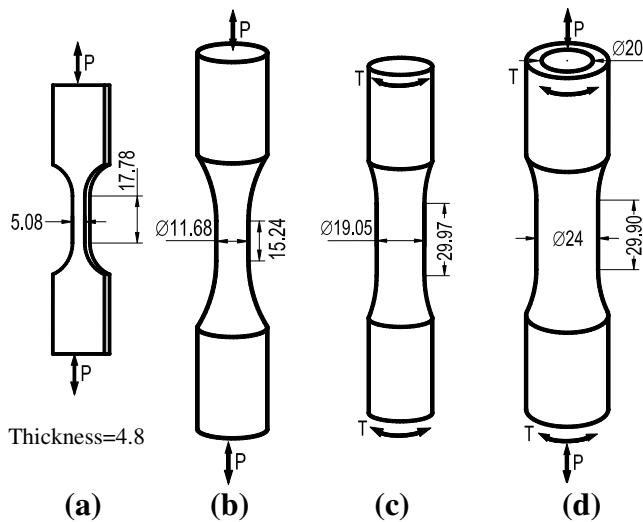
Specimens and loading conditions (all dimensions in mm).
